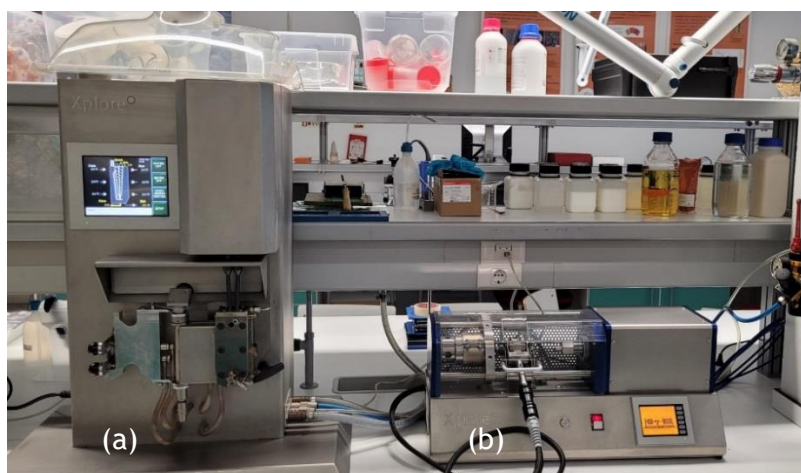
Laboratory equipment (a) micro extruder with twin screw mixer (b) injection moulding machine.
